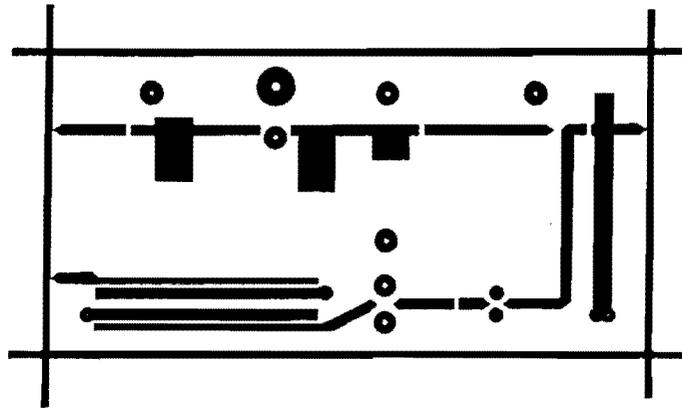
1296MHz RF front-end PCB (0.8mm double-sided FR4).
